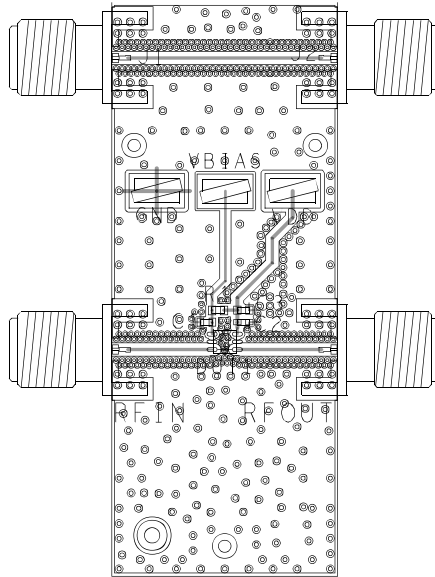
EV1HMC8412LP2F Assembly Drawing (J1 and J2 are Not Installed)
